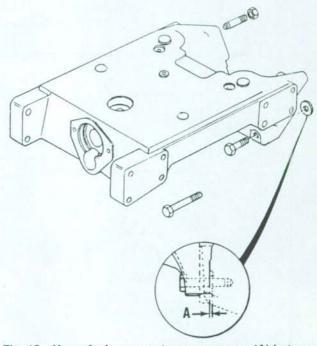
Use a feeler gauge to measure gap (A) between the lower ears of casting and four-cylinder engine of 365-398 models.
